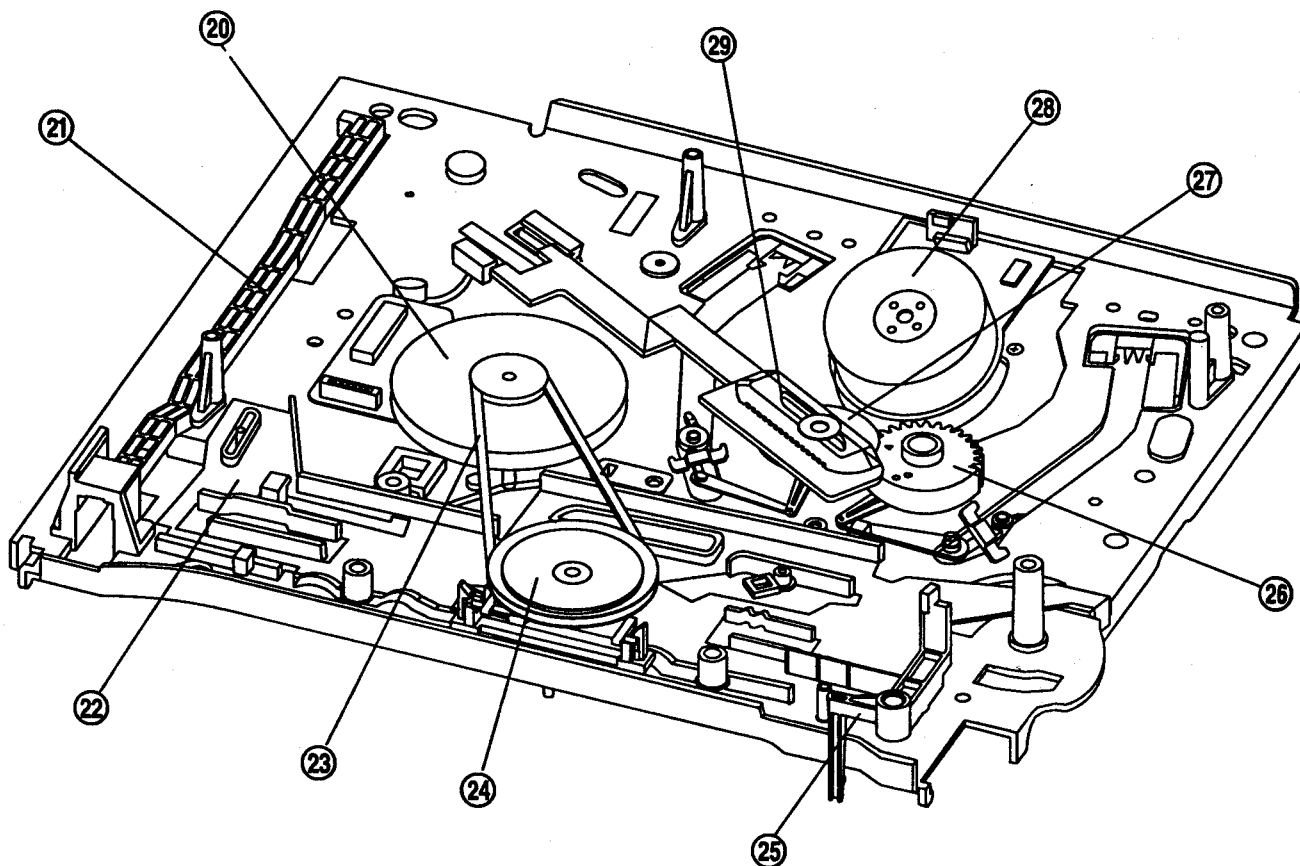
Tape Transport Mechanism Identification (Bottom View)
